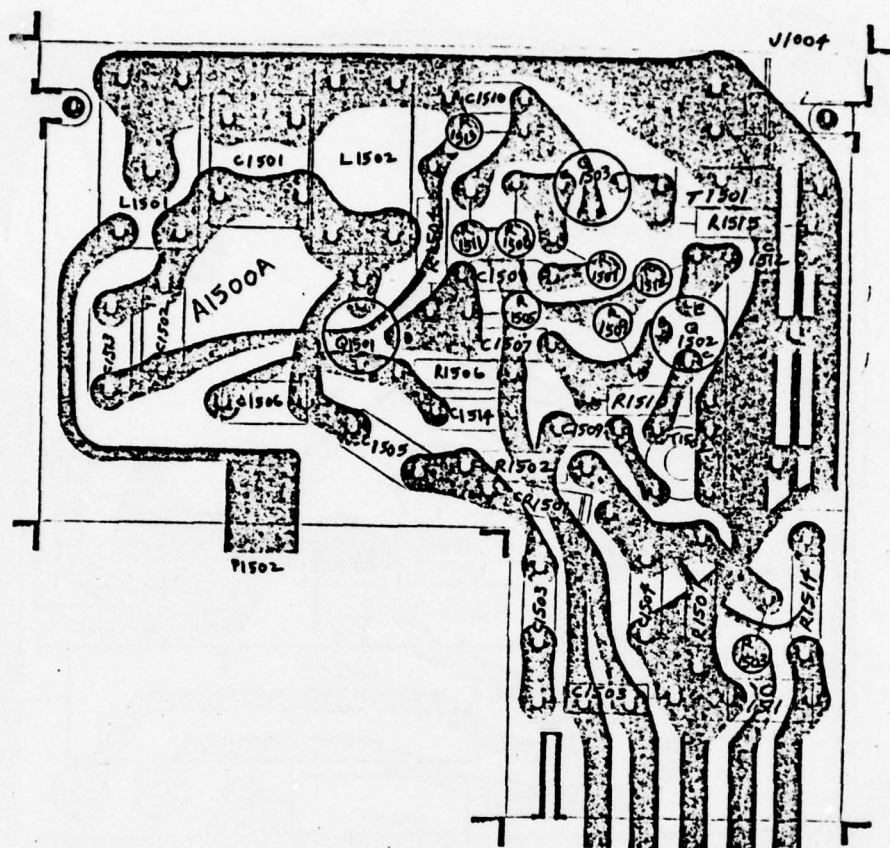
P.C. BOARD LAYOUT FOR THE A1400A RECEIVER MIXER AND BUFFER AMPLIFIER ASSEMBLY
